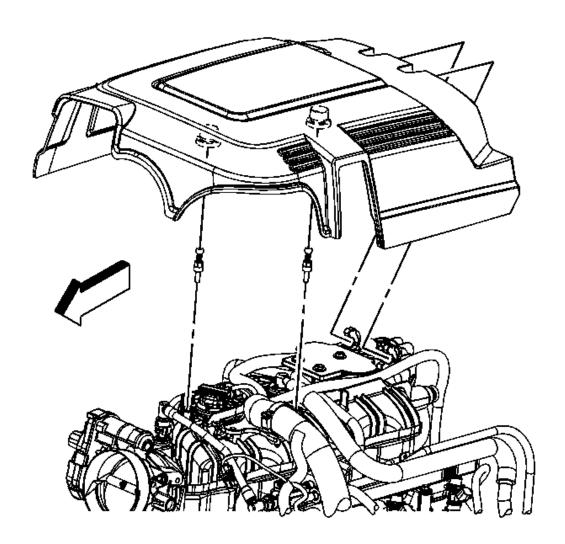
View Of Upper Intake Manifold Sight Shield Courtesy of GENERAL MOTORS CORP.
